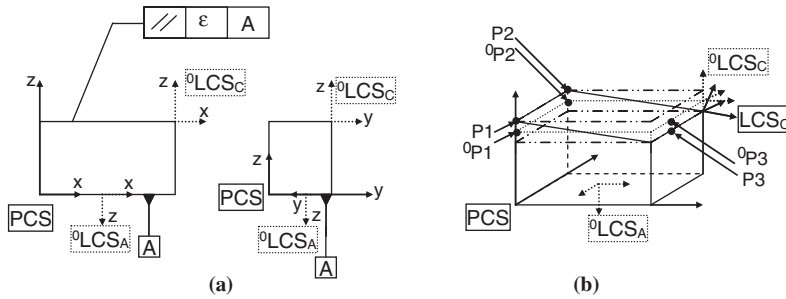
Engineering drawing and true workpiece for a parallelism requirement.
